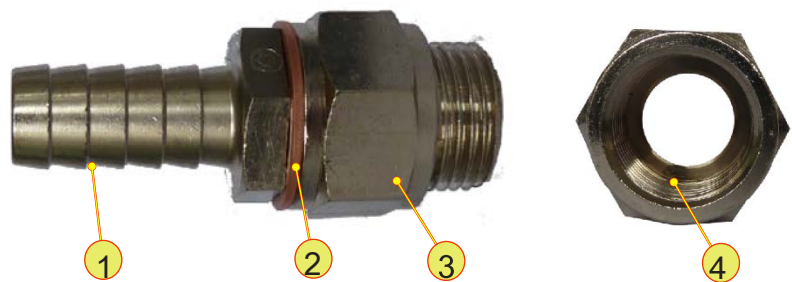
Hose connection fitting -1- with spacer ring -2- and adapter -3- with nut -4-.
